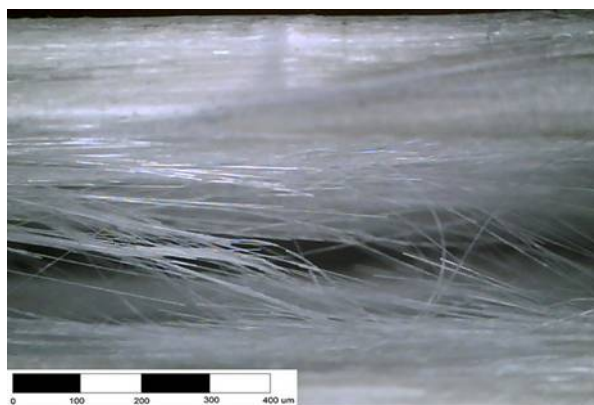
Connection position after failure in the sample with welding time of 1.8s.
